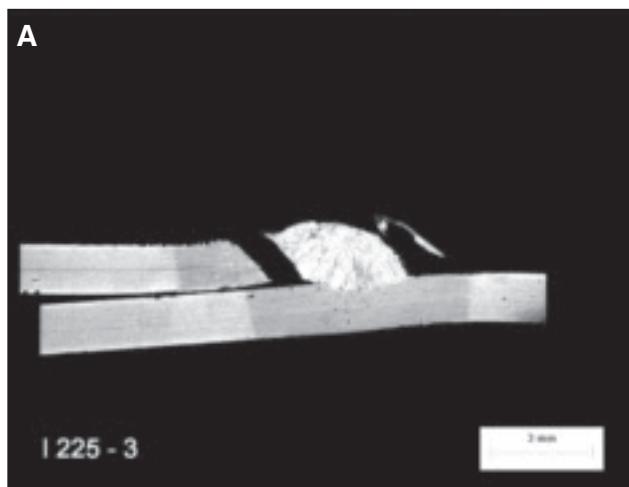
Fracture appearance of TRIP 780 high cooling rate lap joint produced with the ER100S-G wire. (Failure is along the weld interface of the top sheet, possibly initiating at porosity present at the root.)
